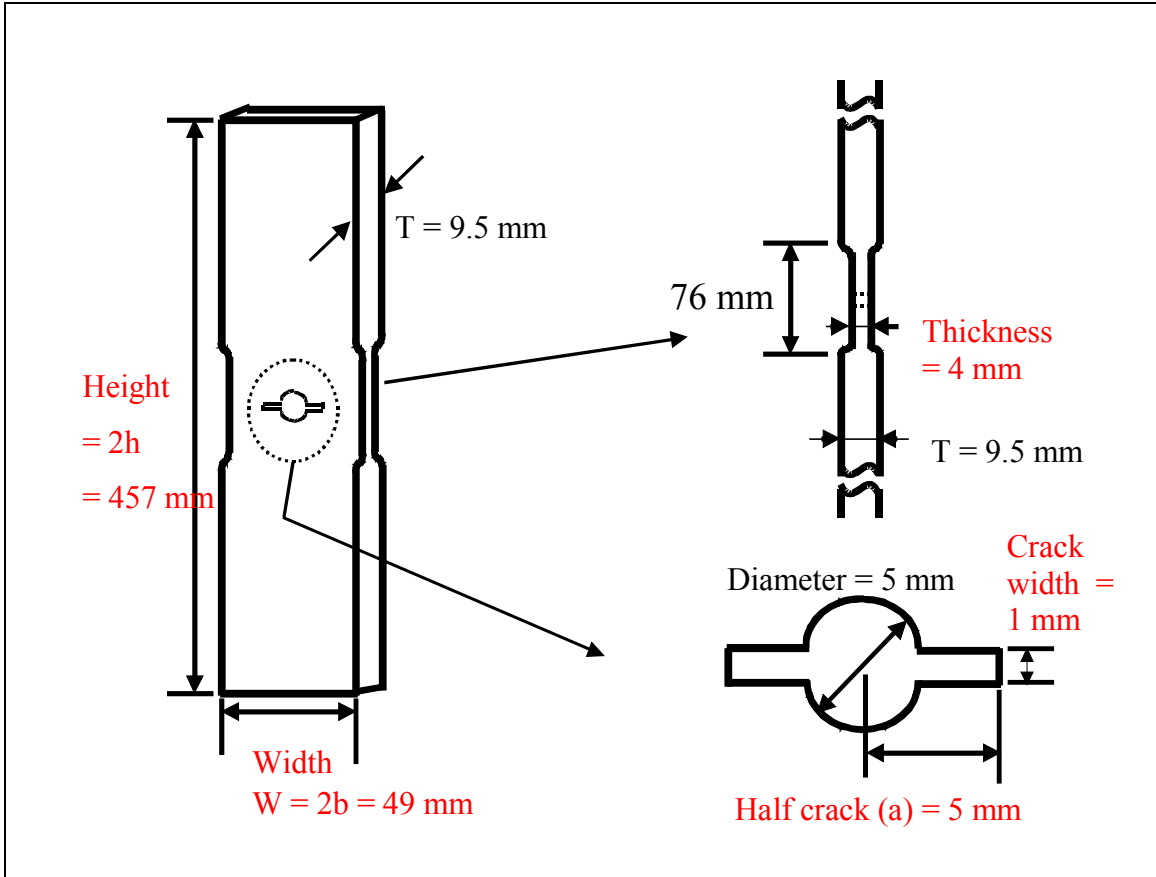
Geometry and dimension of test specimen-ASTM E647
